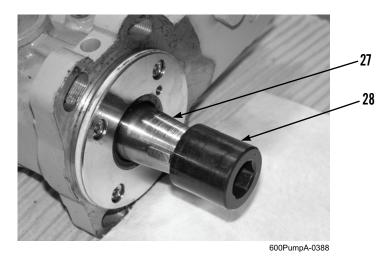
Tensioning Nut and Fuel Injection Pump Shaft.
